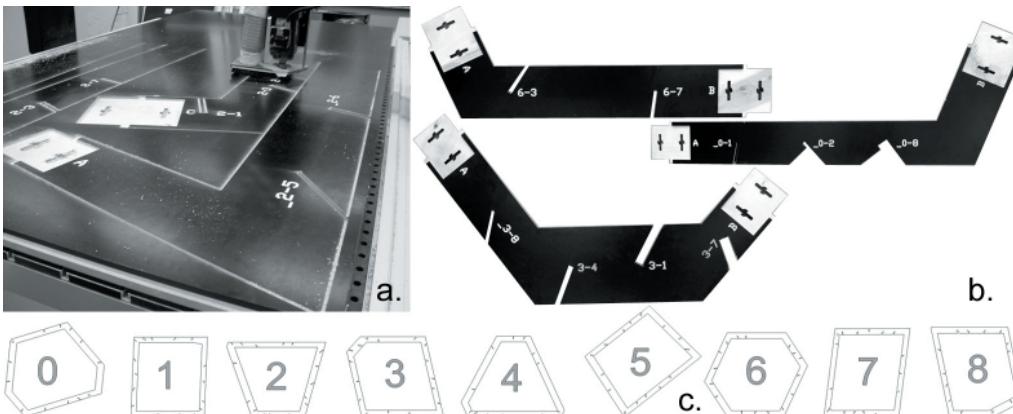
Production process. (4a) elements were cut by 3-axis milling machine; (4b) elements of the frame with engraved descriptions; (4c) set of frames for the prototype;
